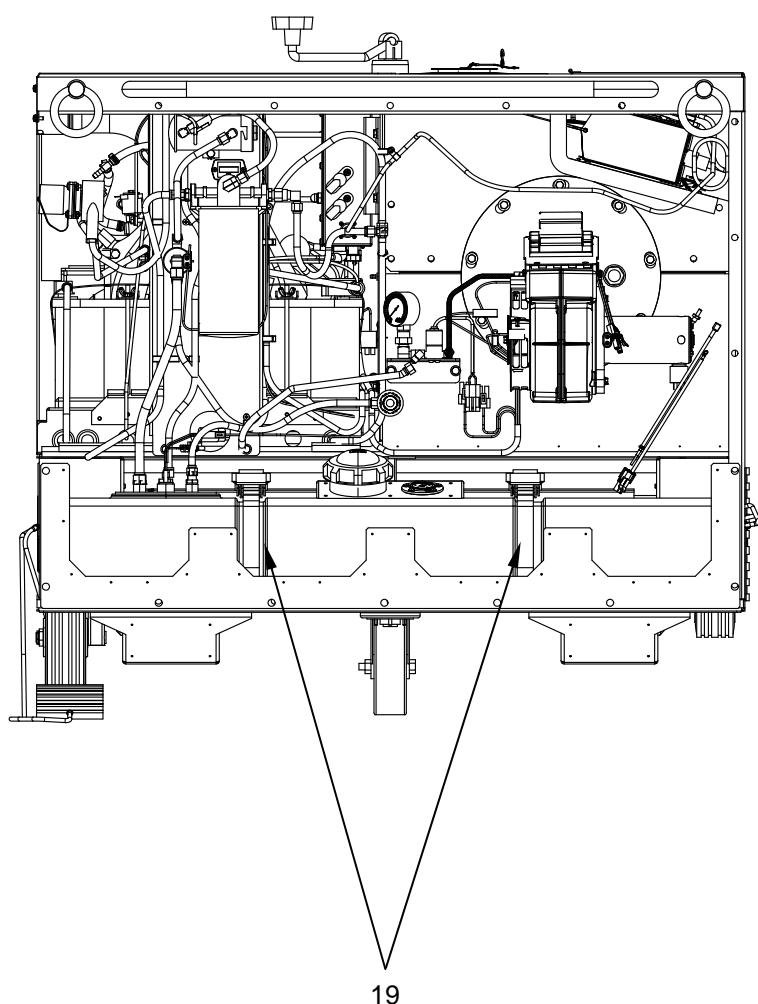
Fuel Tank Assembly (Sheet 4 of 5).
